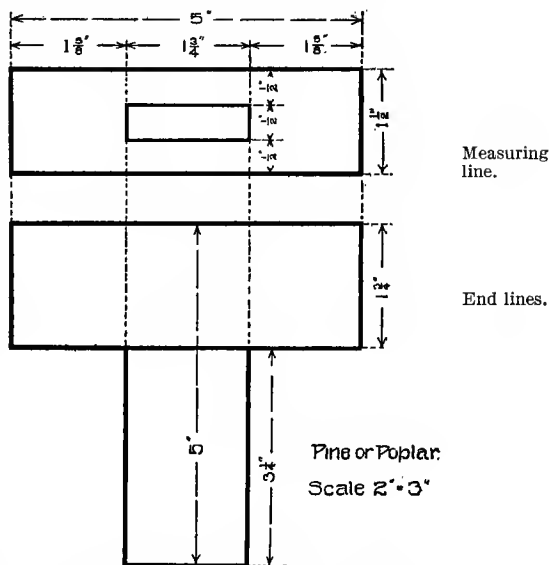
Mechanical Drawing of Through Mortise and Tenon Joint
